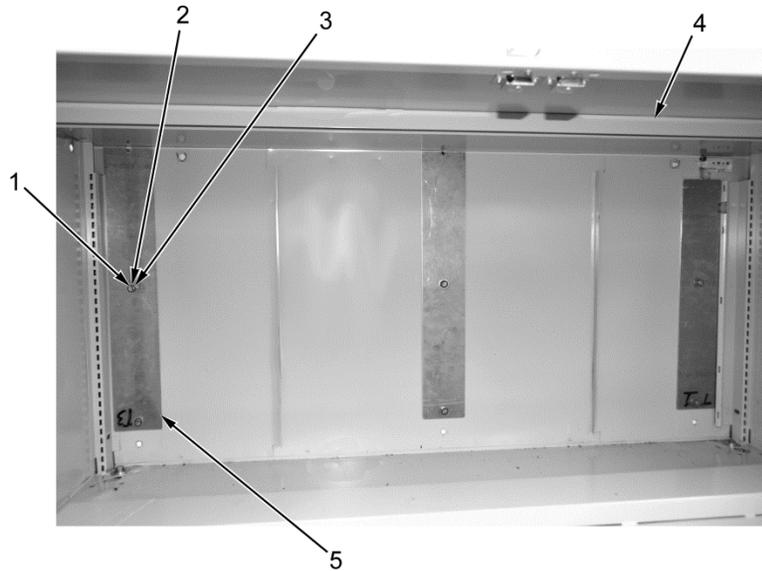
Tool Cabinet D Shelf and Pan Removal.
